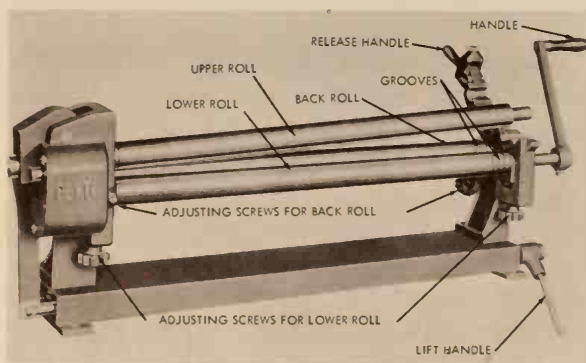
Forming rolls. (Peck, Stow & Wilcox Co.)
